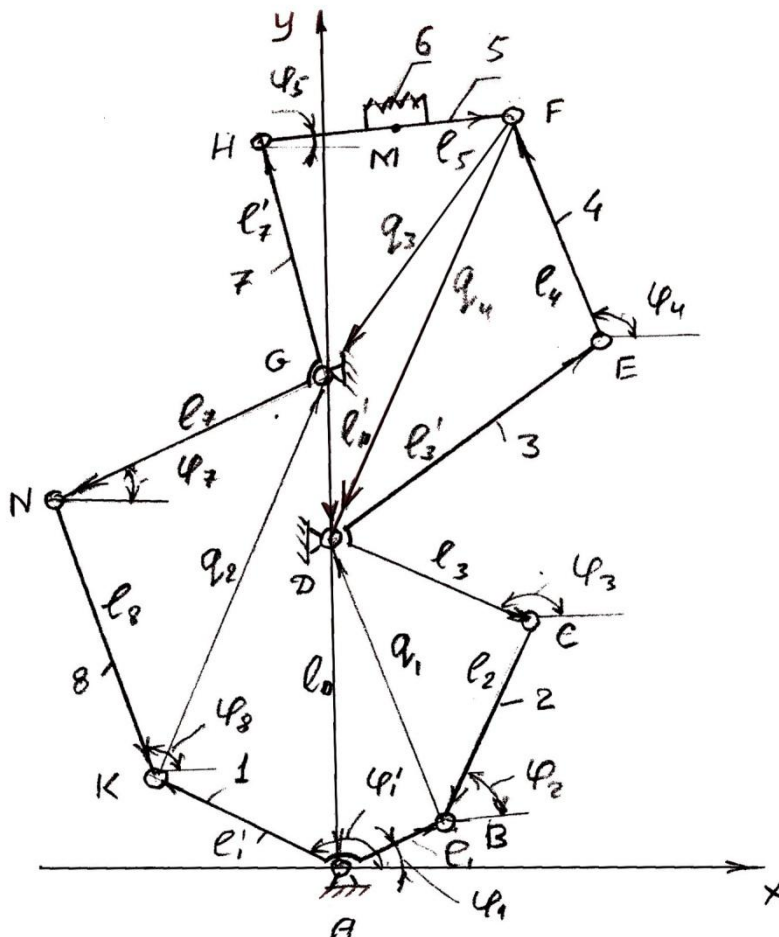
Kinematic diagram of a closed mechanism for moving material of a sewing machine.
